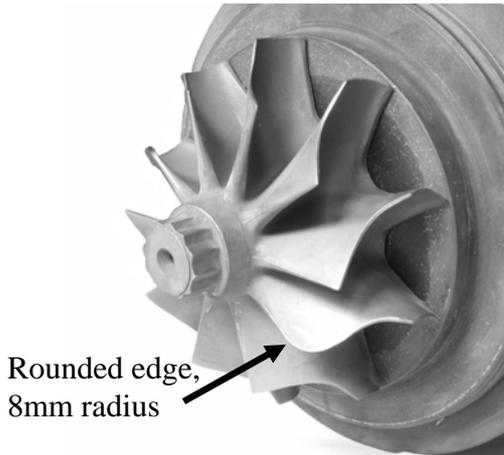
Free-power turbine impeller, damaged blade shown.
